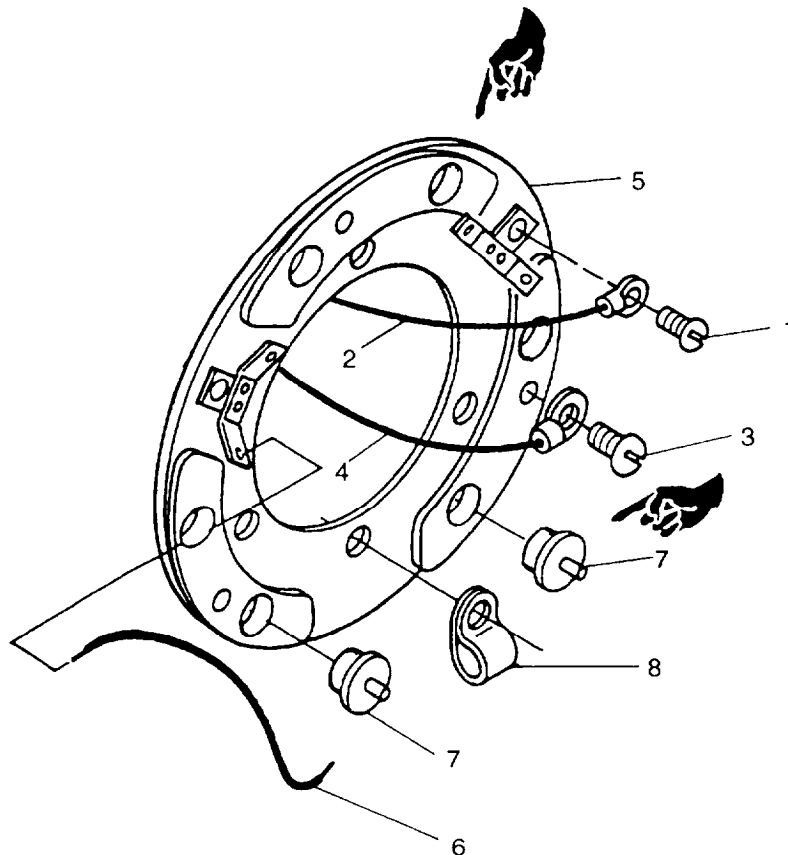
Rectifier Assembly (MEP-804A)
